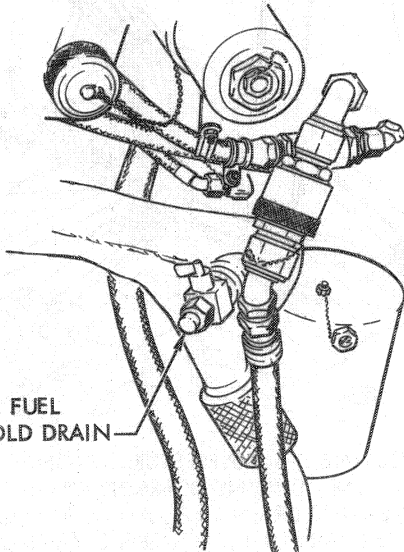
Engine Disconnection (Sheet 2 of 5)
